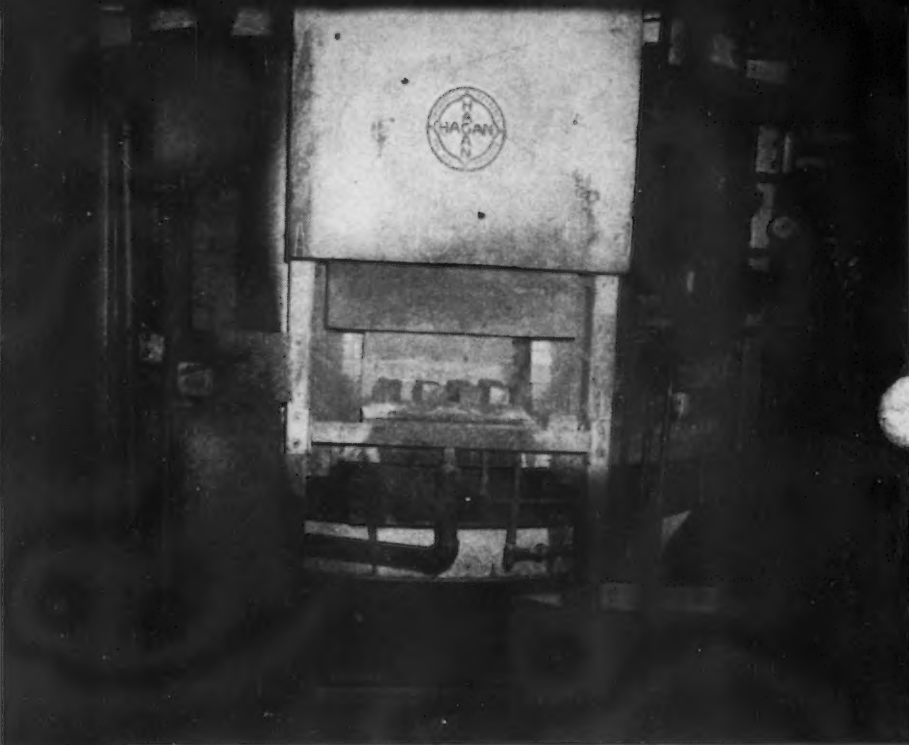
Through the charging door of one of the new furnaces can be seen a part of the rotary hearth. One of the burners for using oil fuel is shown at right.
